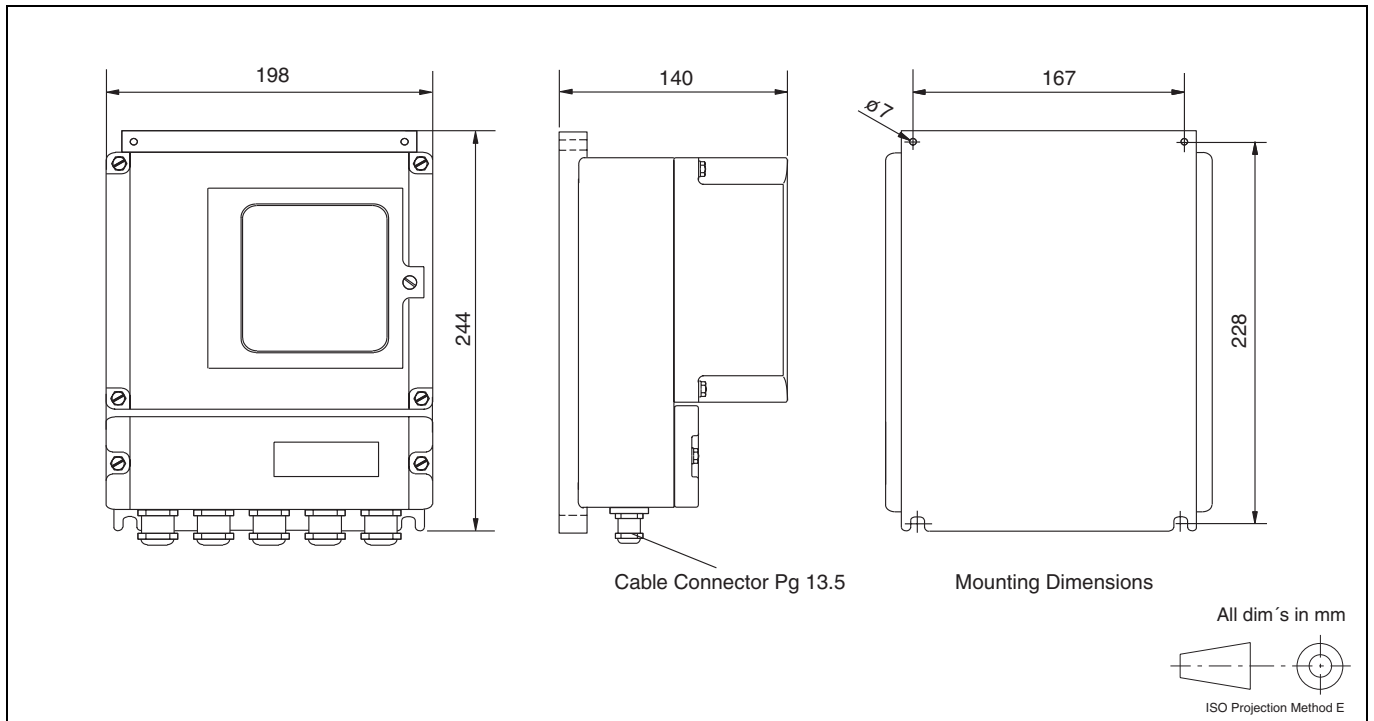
Dimensions Converter Field Mount Enclosure with Window
